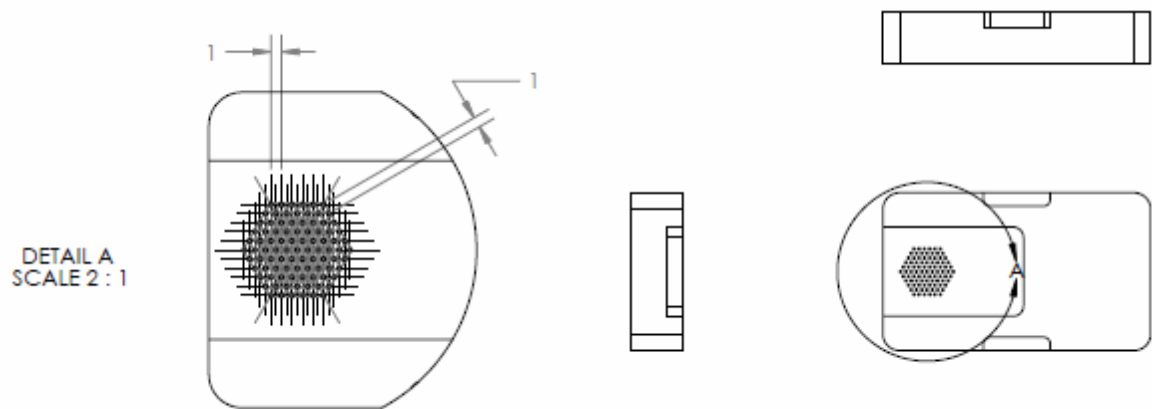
Mold with 1.0 mm hexagonal spacing pattern (dimensions in mm).
